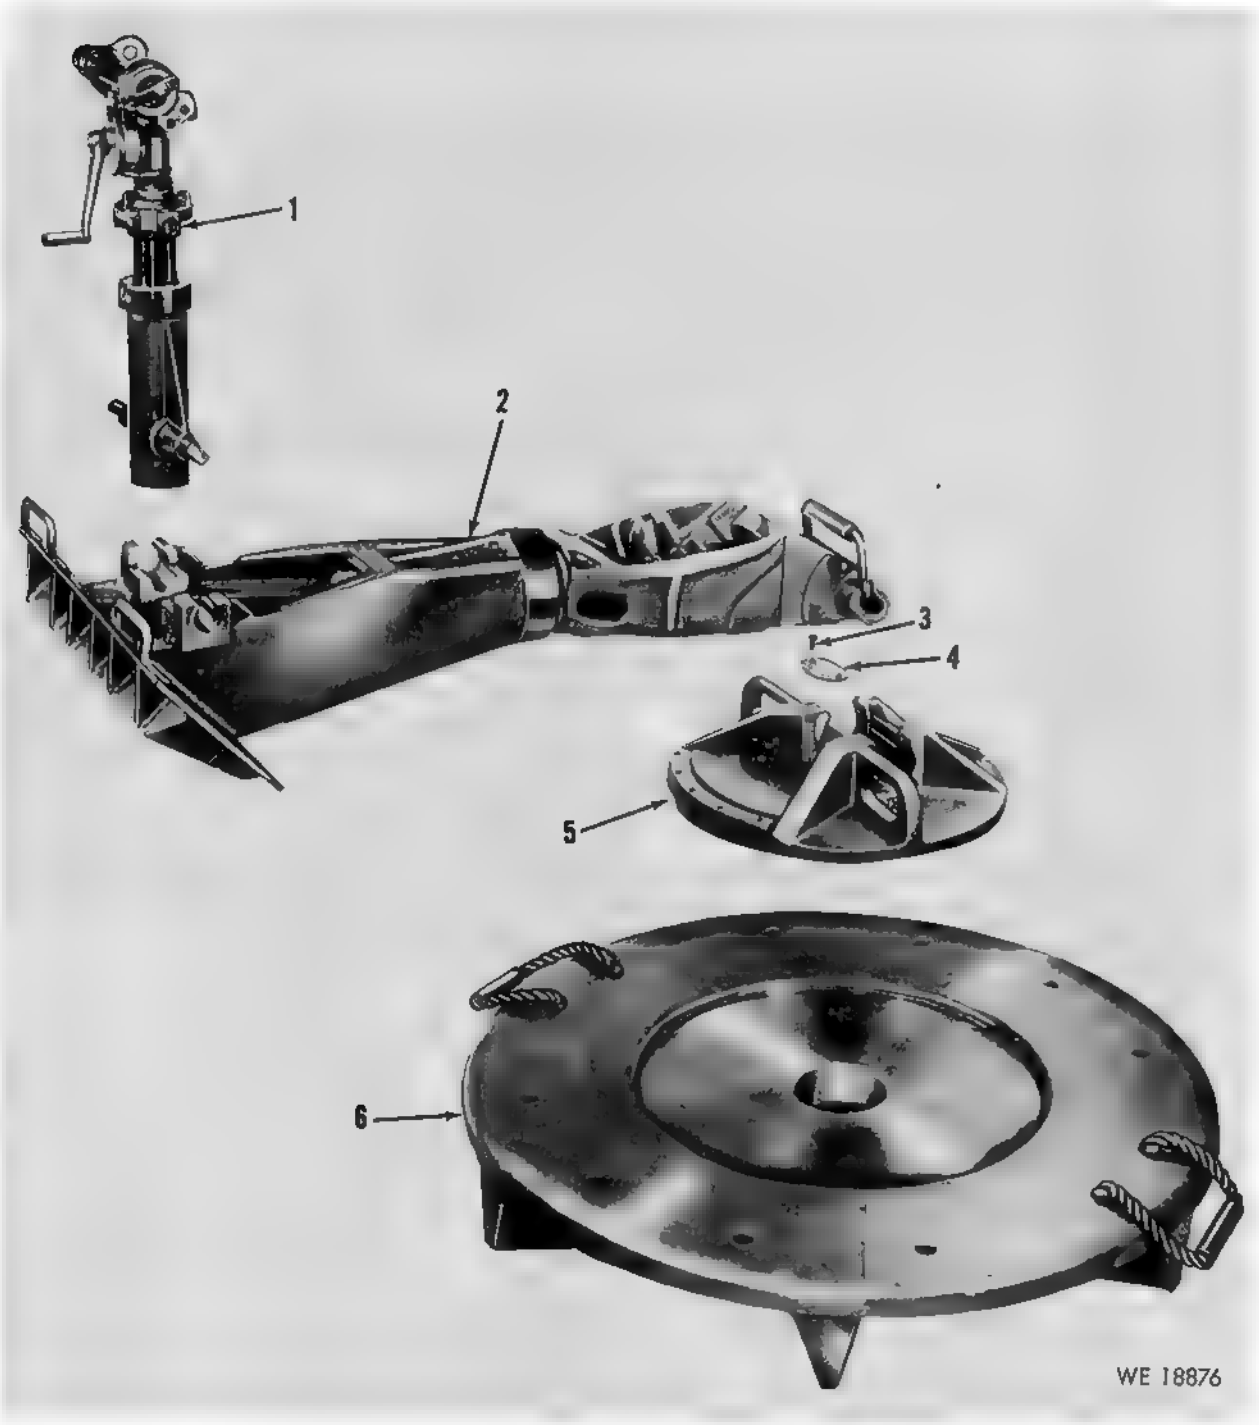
Mount, mortar, 4.2-inch, M24 and M24A1—exploded view.
